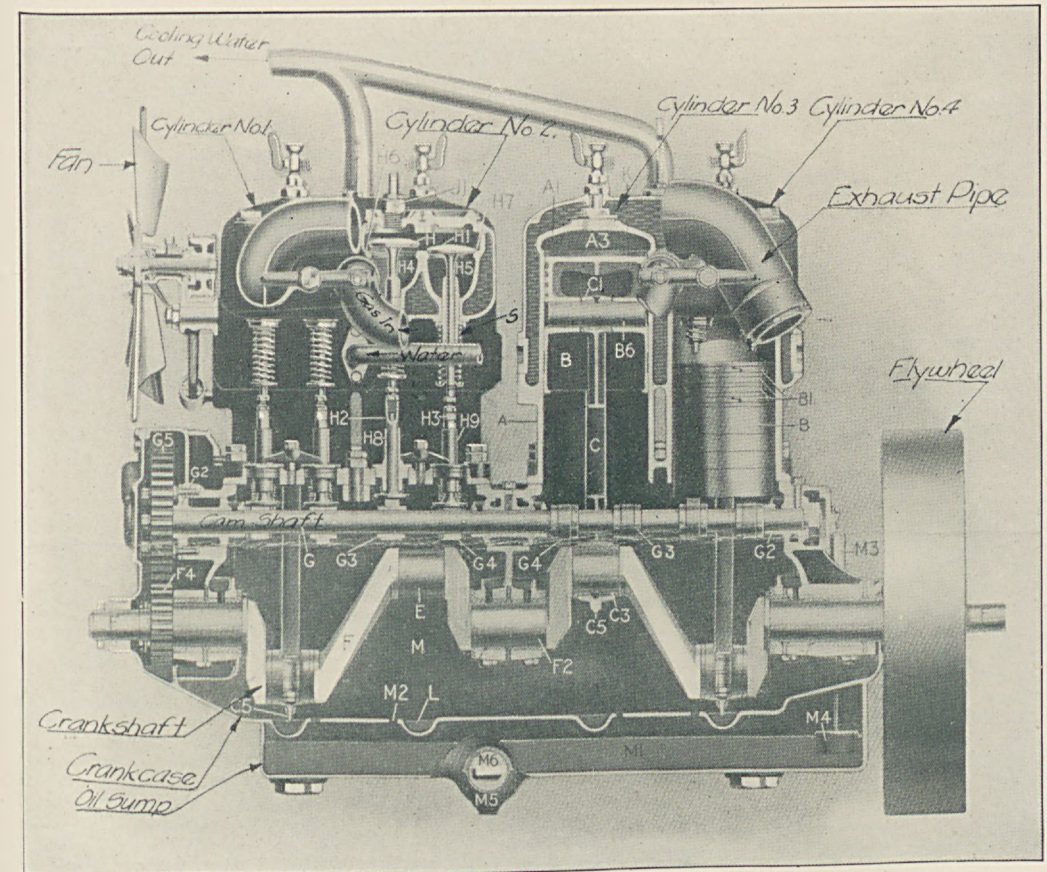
Part Sectional View of a Four Stroke Cycle Automobile Engine
